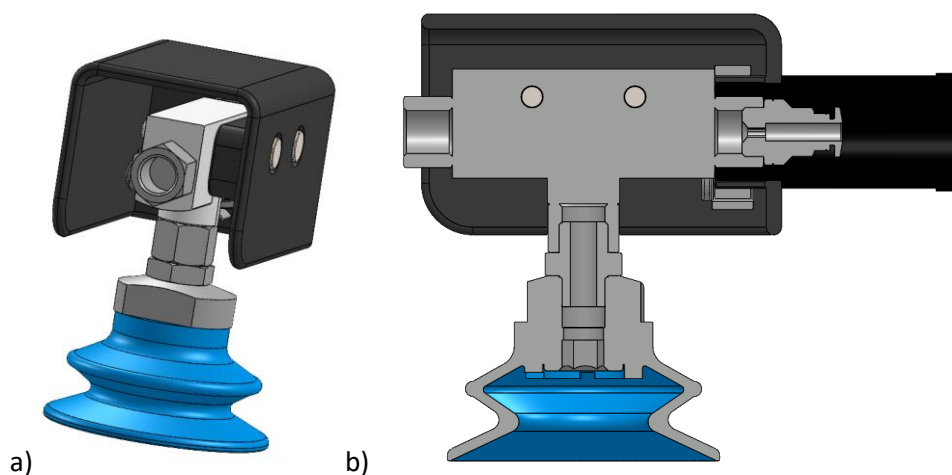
Suction cup mount and vacuum generator assembly: vacuum generator seated against the gripper mount (a), and section view of the concealed fittings (b)
